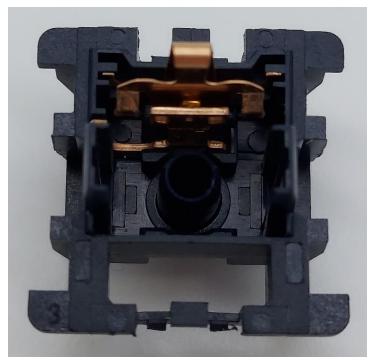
Internal bottom housing mold markings with single number marking on bottom left-hand lip.
